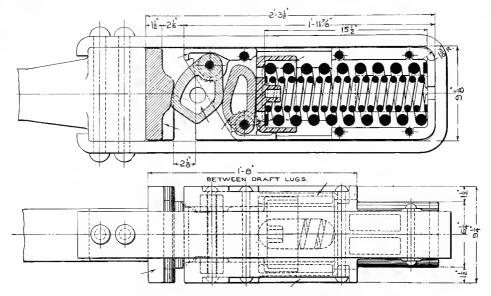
Butler Tandem Spring Draft Gear with 8-in. x 8-in., Class G, Springs, Applied to Car with Steel Center Sills. Butler Drawbar Attachment Co.
